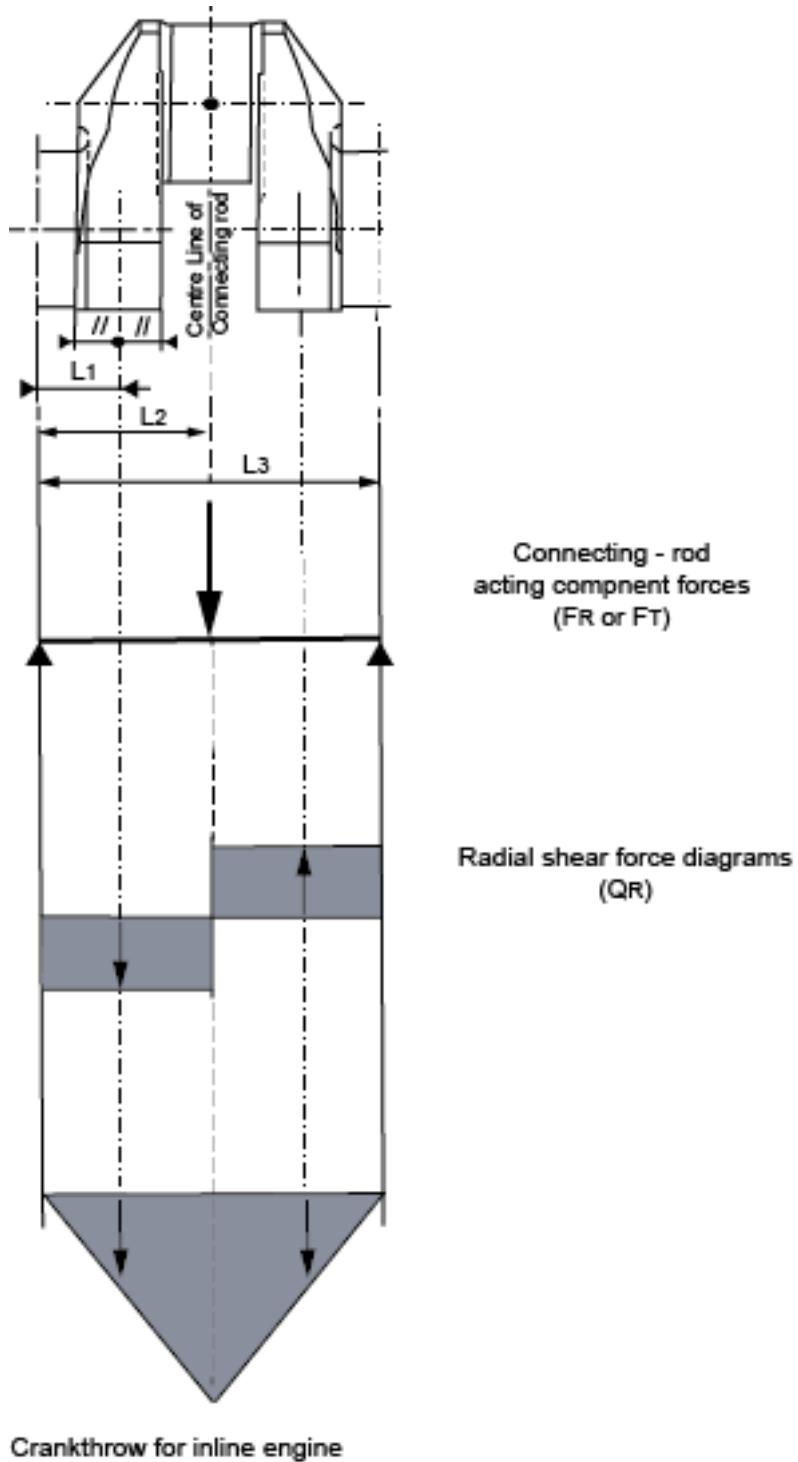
Bending moment and shear force for in-line engine crankthrows
